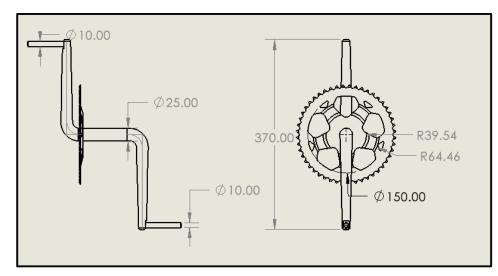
Technical drawing of Sprocket. All dimensions in mm.
